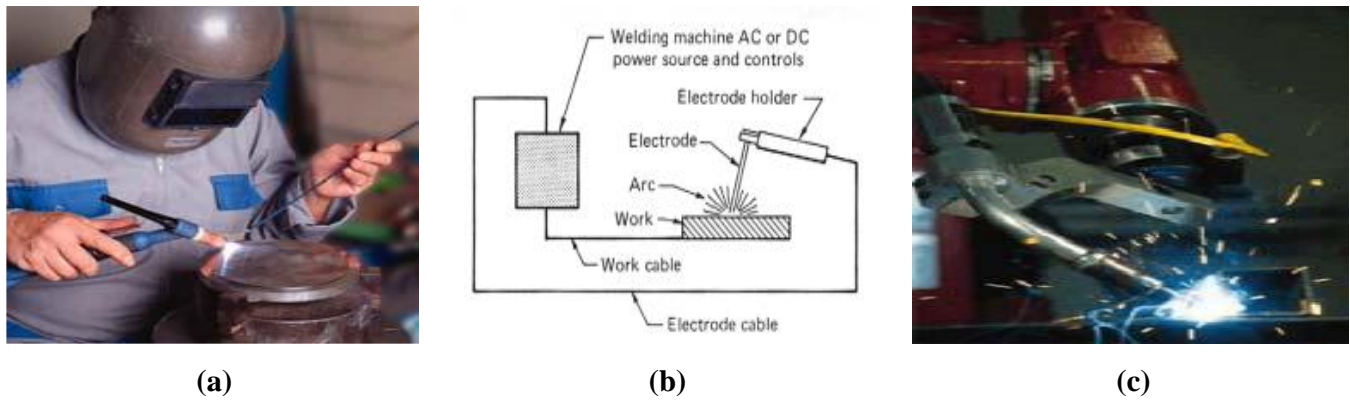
(a) Gas welding (b) Schematic of Arc welding
